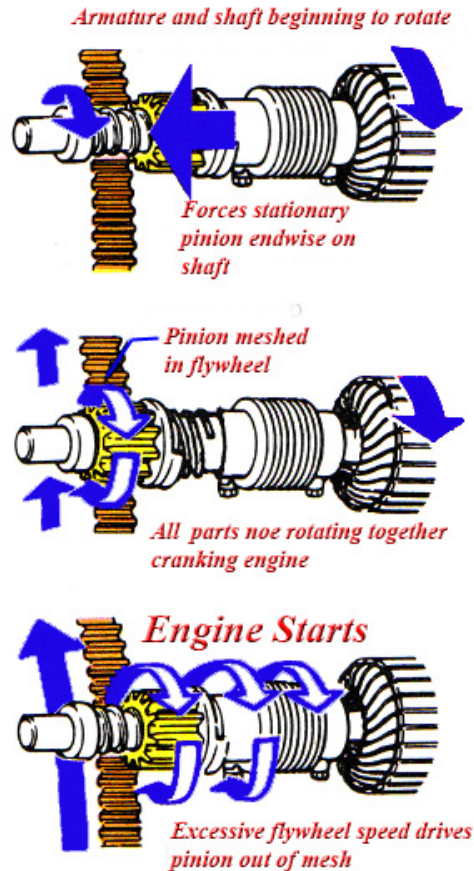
Schematic detailing Bendix Movement in an Engine Starter Mechanism⁷
